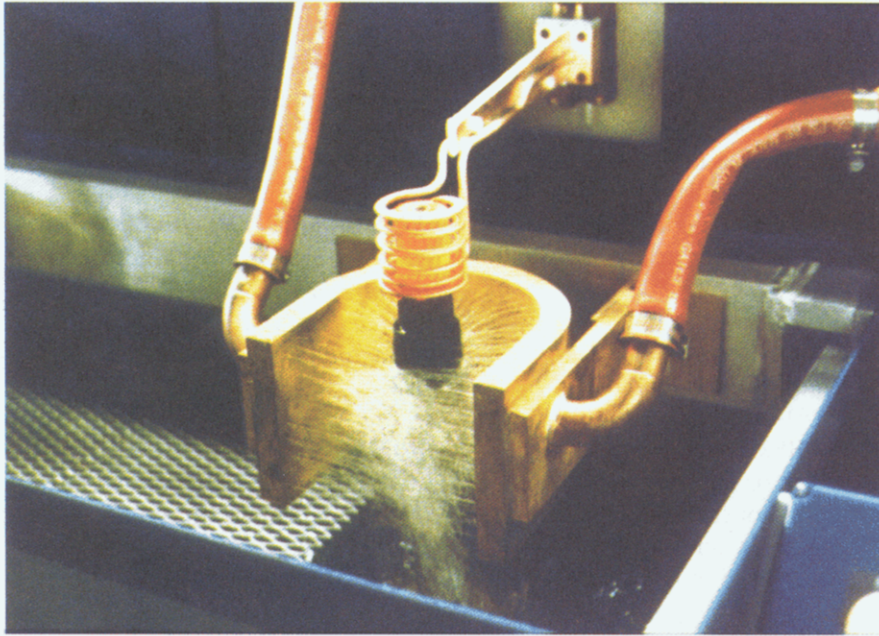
Induction Heating Coil Used to Case Harden a 4140 Steel Pinion Gear
